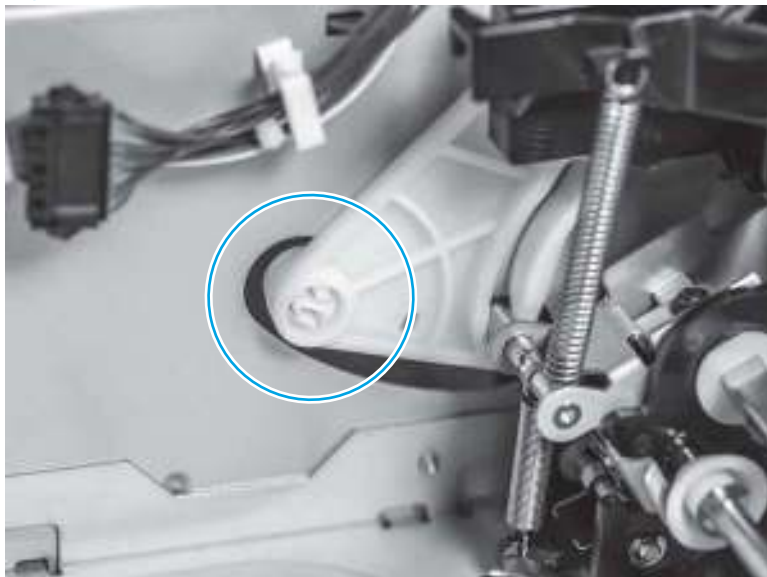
Reinstall the cartridge-lifter assembly (M830; 4 of 6)
